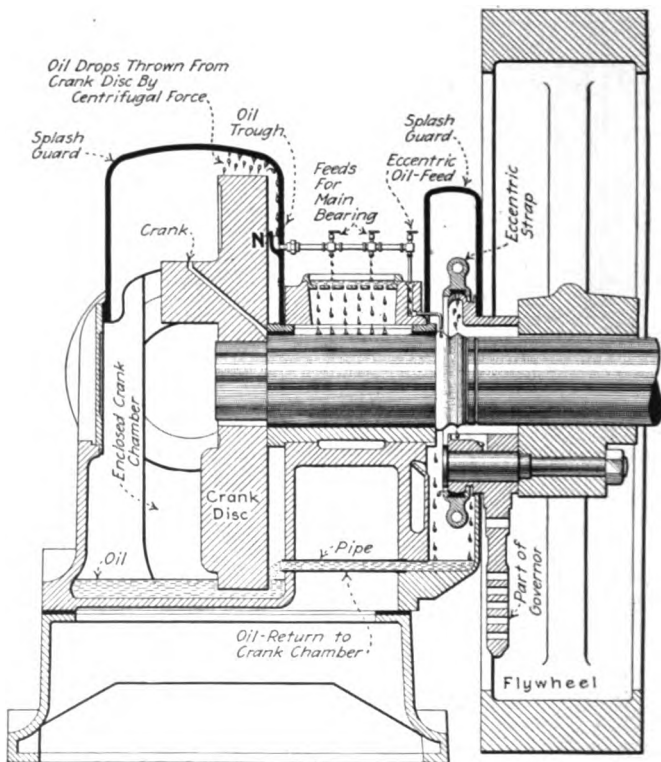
Section through splash-oiled engine at shaft, showing oil distribution to bearings. (Chandler & Taylor Co.)
